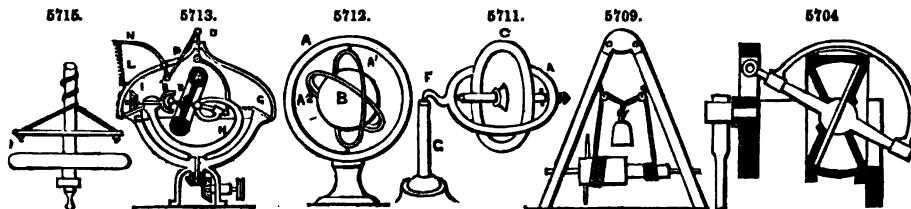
What is called the gyroscope governor, for steam-engines, introduced by Alban Anderson, in 1858. A is a heavy wheel, the axle B, B', of which is made in two pieces connected together by a universal joint. The wheel A is on one piece, B, and a pinion I on the other piece, B'. The piece B is connected at its middle by a hinge-joint with the revolving frame H, so that variations in the inclination of the wheel A will cause the outer end of the piece B to rise and fall. The frame H is driven by bevel-gearing from the engine, and by that means the pinion I is carried round the stationary toothed circle G, and the wheel A is thus made to receive a rapid rotary motion on its axis. When the frame H and wheel A are in motion, the tendency of the wheel A is to assume a vertical position, but this tendency is opposed by a spring L. The greater velocity of the governor, the stronger is the tendency above mentioned, and the more it overcomes the force of the spring, and the reverse. The piece B is connected with the valve-rods by rods C, D, and the spring L is connected with the said rod by levers N and rod P.
